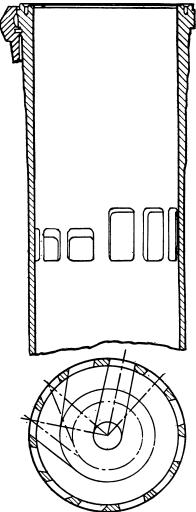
Wet Sleeve for 2-Cycle Engine.
